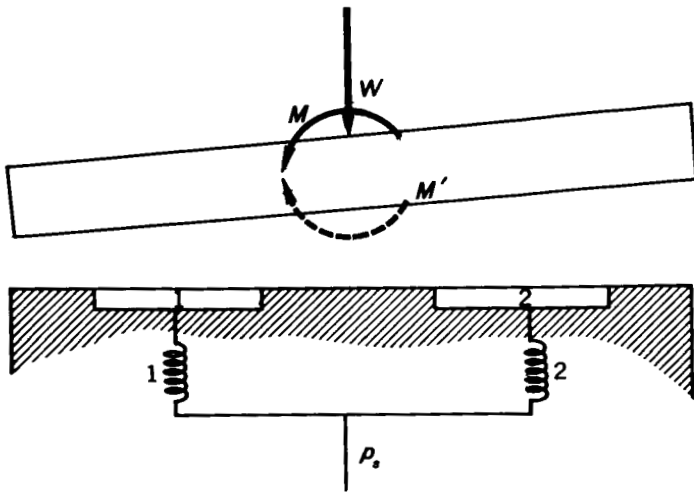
Section through four-pad compensated thrust bearing.
